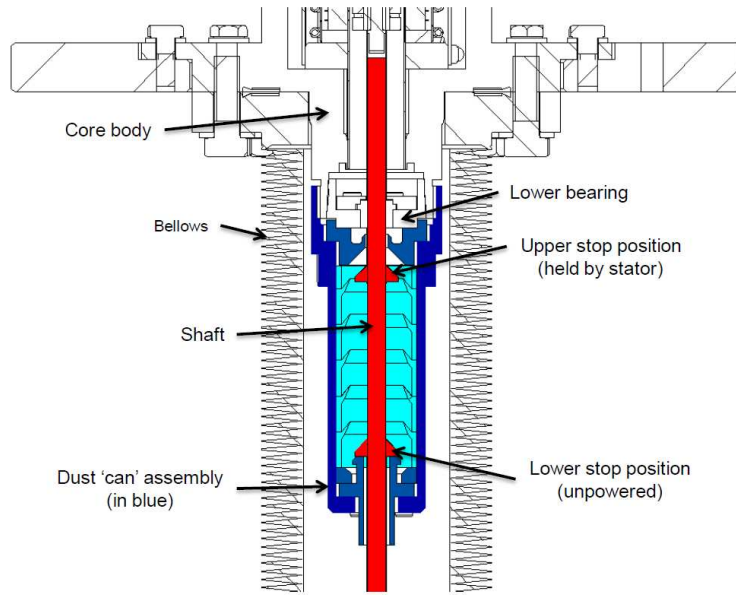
Dust 'can' assembly, that captures the dust below the lower bearing.
